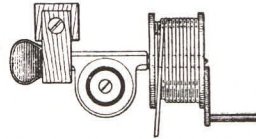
SMALL BOBBIN DRIVEN DIRECTLY ON COUNTER SPINDLE, TURNED BY HAND
